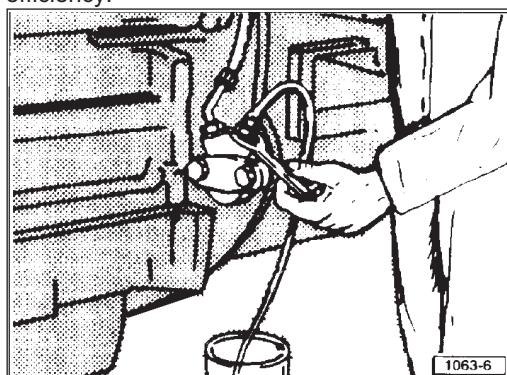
Bleeding the air from the clutch hydraulic circuit.
